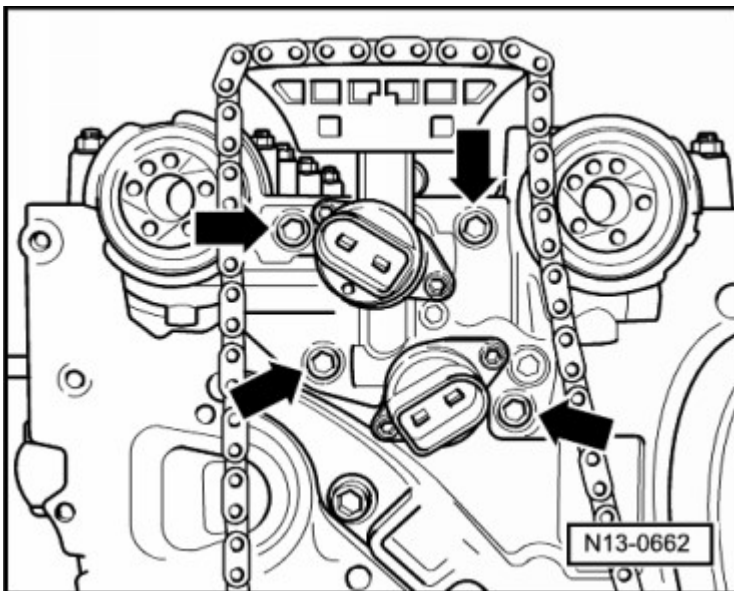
Locating Control Housing-To-Cylinder Head Bolts
